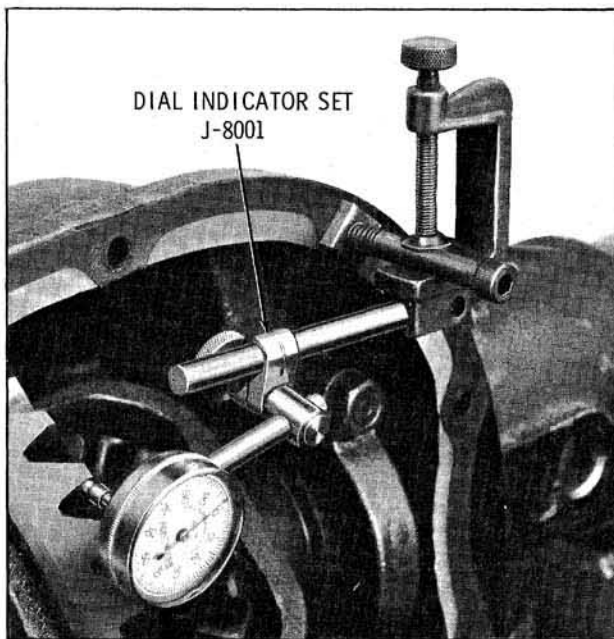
Checking Ring Gear To Pinion Backlash
